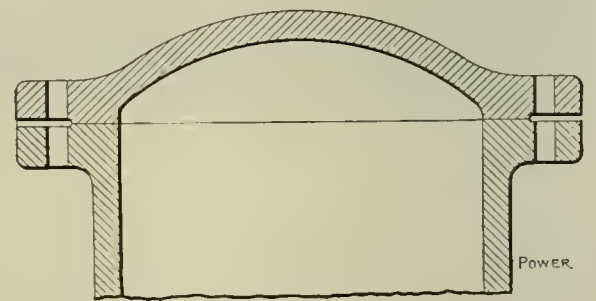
PREFERRED DESIGN FOR BLANK FLANGE
